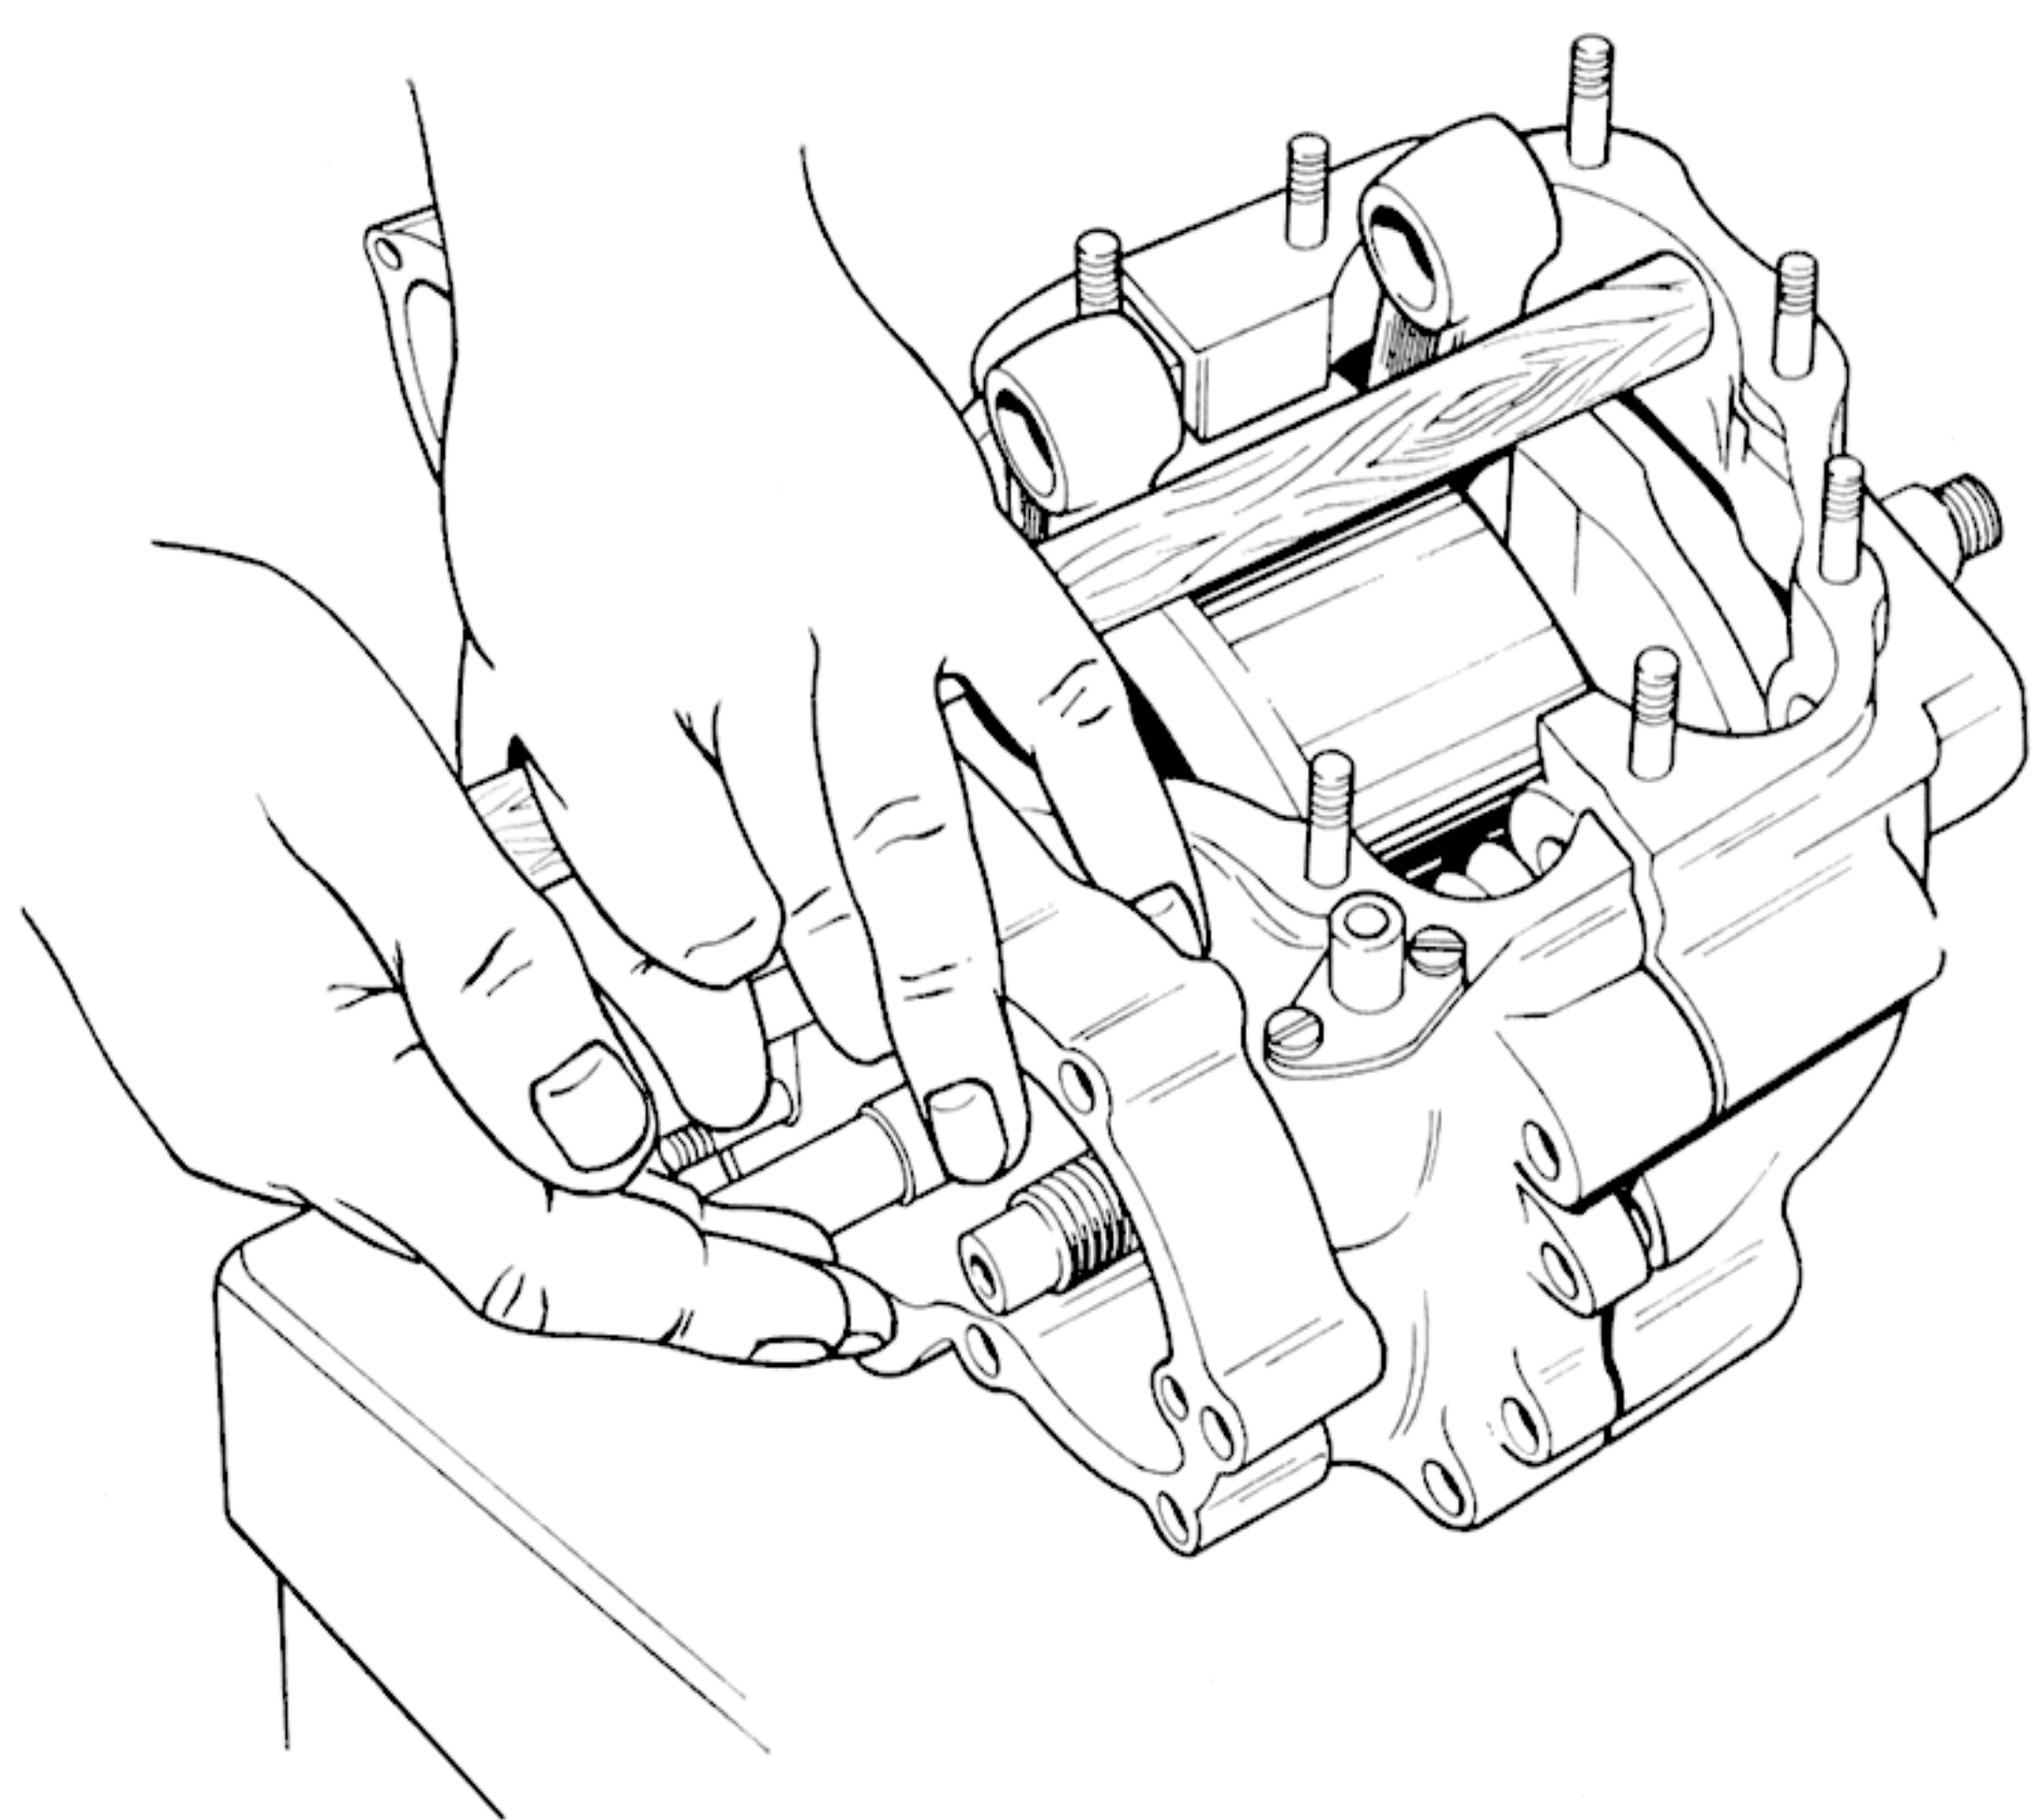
Extracting crankshaft pinion using tool ET 2003
